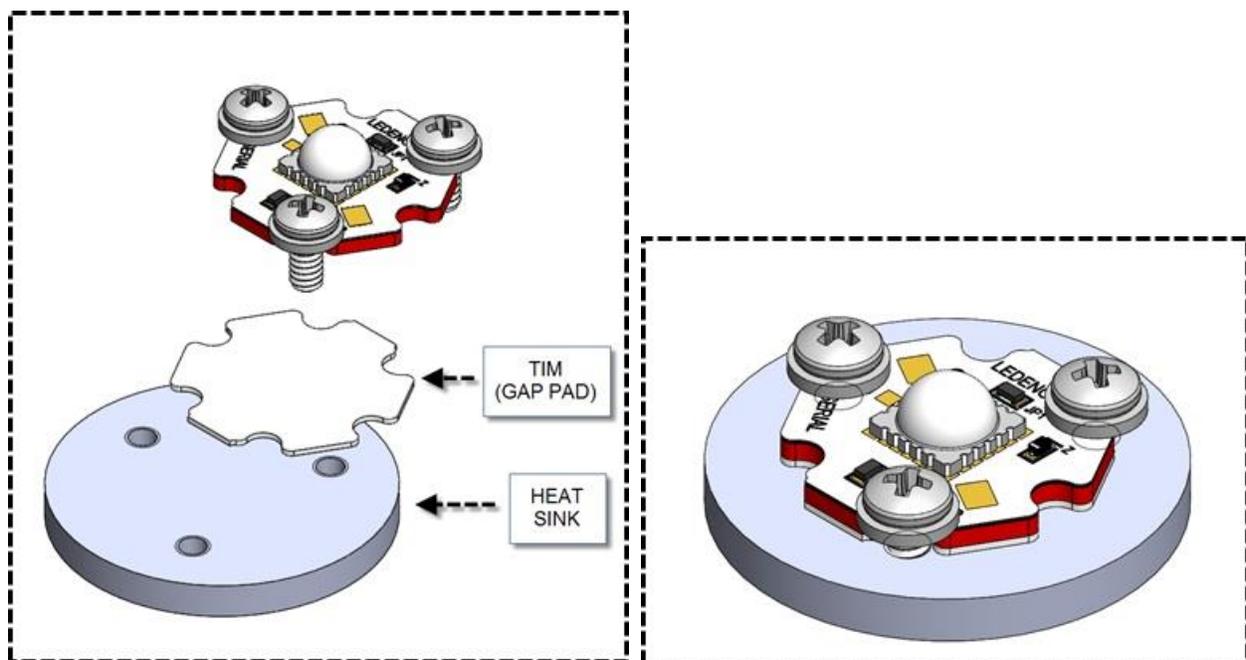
Reference assembly drawing of LZ9 and typical "star" shaped MCPCB
